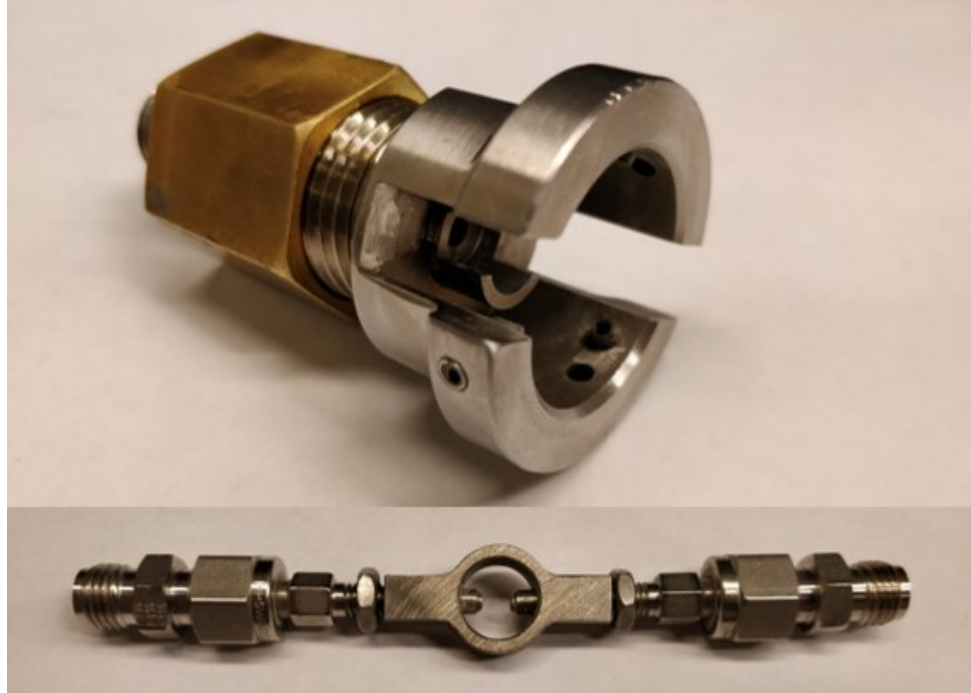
Powder feeding insert, spring, and nozzle holder insert
